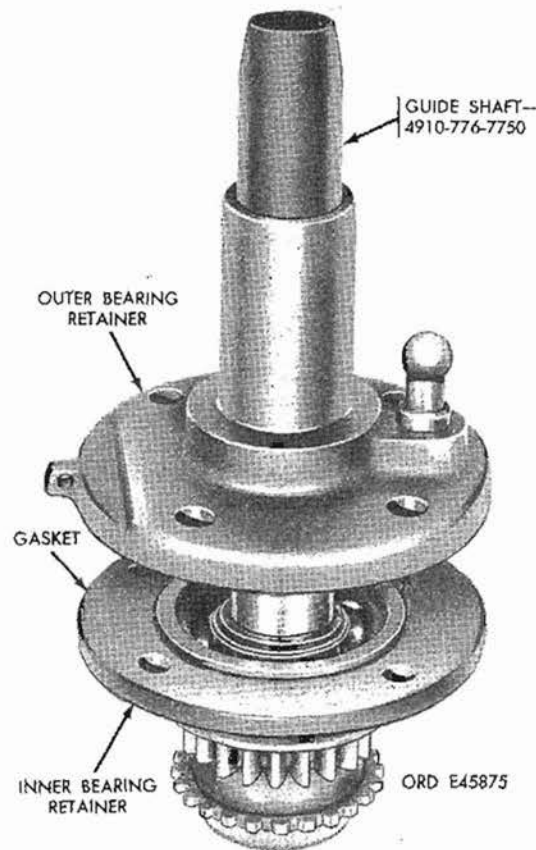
Installing outer bearing retainer, using guide shaft - 4910-776-7750.
